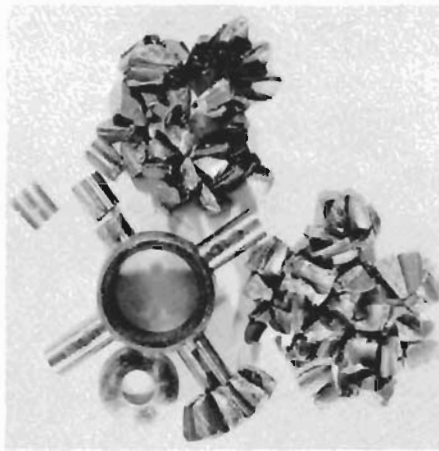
Differential internal spider and pinions. Fatigue cracking origin at toe end of the root to bore section, which is rather thin.
